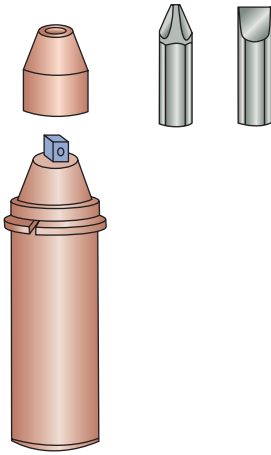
A typical impact screwdriver. Note the removable cap that would allow a socket wrench to fit on the end of the tool.
